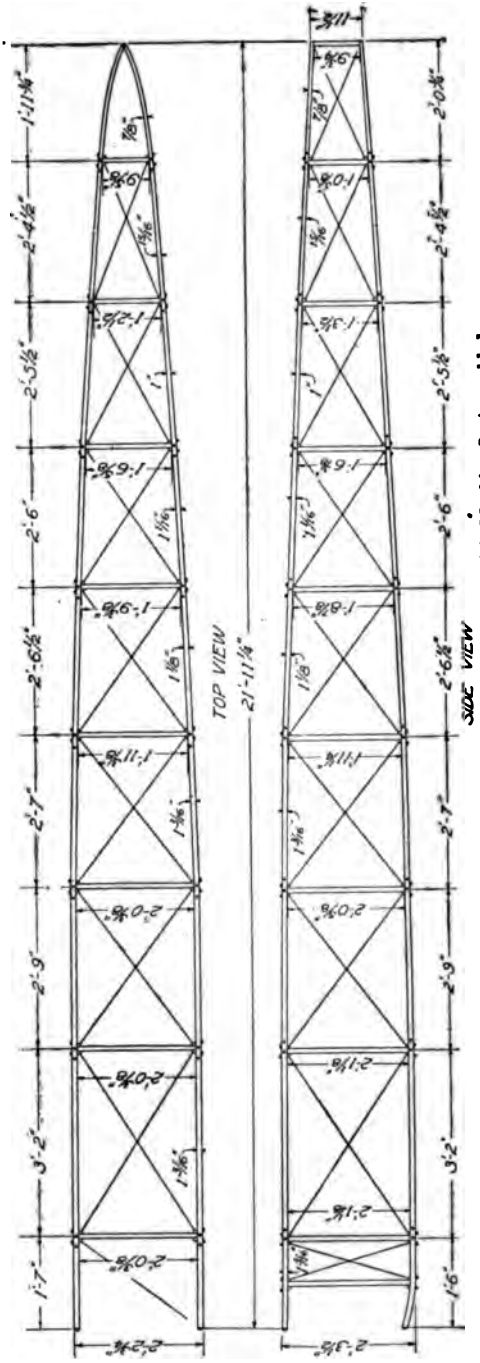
Top and Side View of Blériot Fuselage on Which Machine Is Assembled
